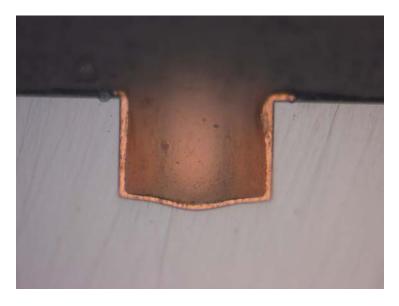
Cu film inside a 50μ m deep hole after Cu etching and dry photoresist removing
